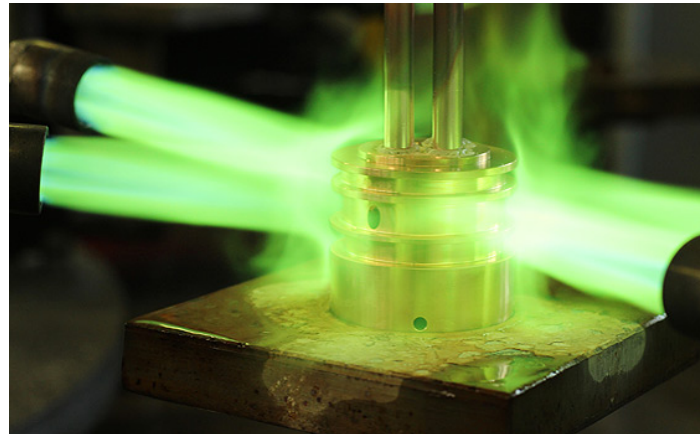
Flame Brazing. Source: <https://www.lwz.de/index.php/en/technical-services/brazing-technology/flame-brazing>
